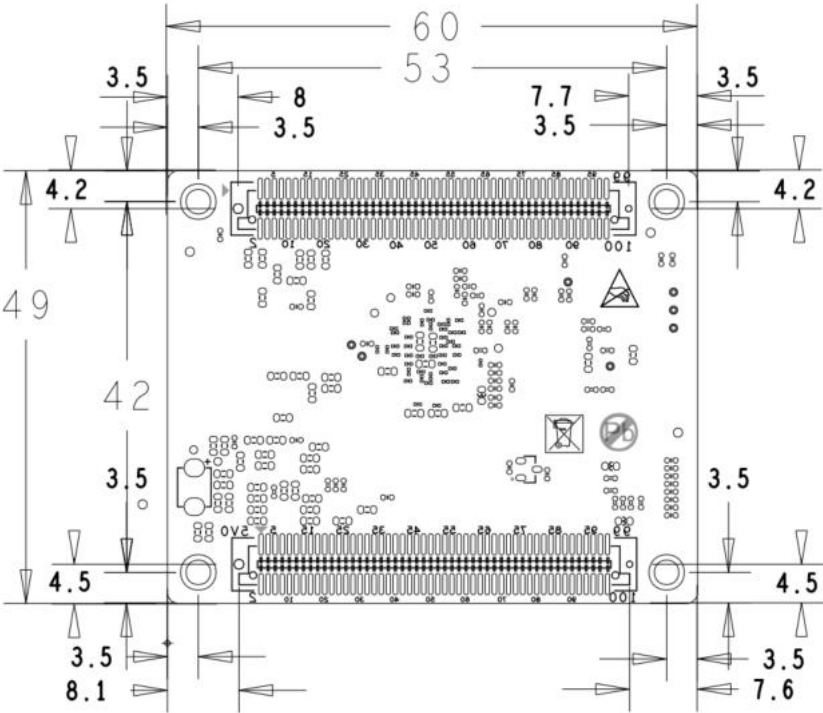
MYC-C8MMX-V2 Core board Bottom view
